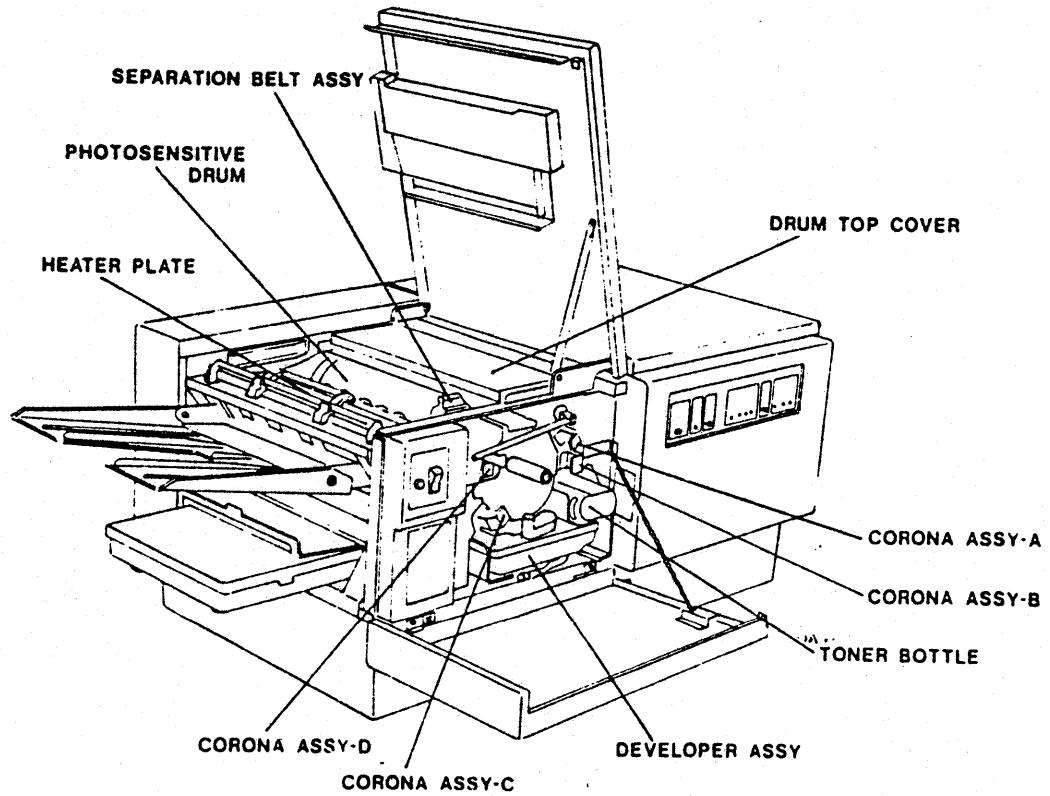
CROSS SECTION OF THE PRINTER (FRONT VIEW)
